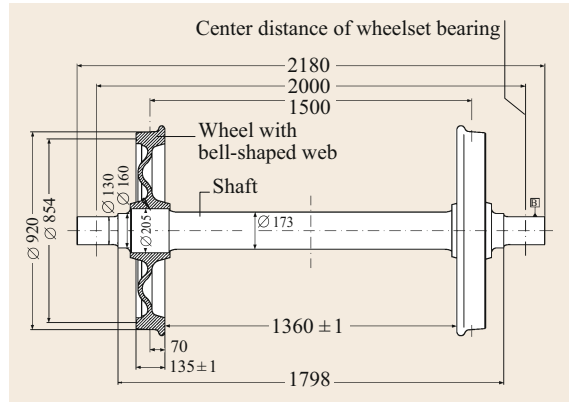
Standard freight car wheelset type BA 304 for 25-t axle load (wheel with bell-shaped web to reduce stresses from block braking), wheel diameter 920 mm new, 854 mm worn, weight 1003 kg (Radsatzfabrik Ilsenburg Rafil)
